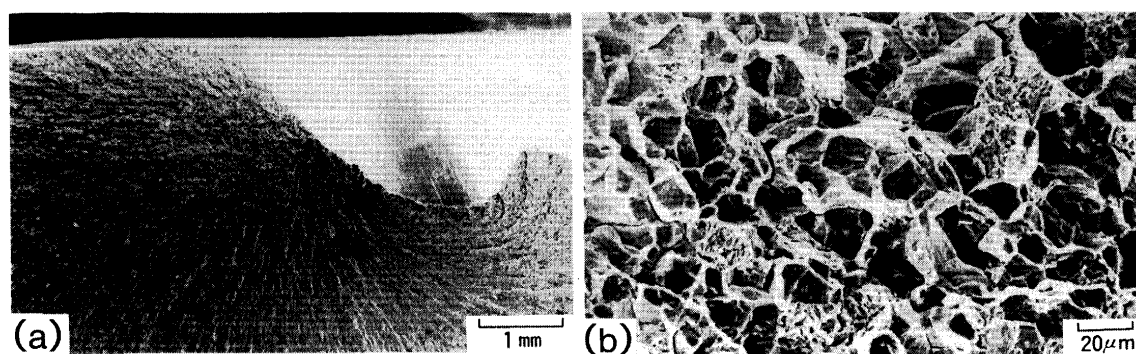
SEM fractographs showing crack initiation site of fractured specimen (steel A6).
